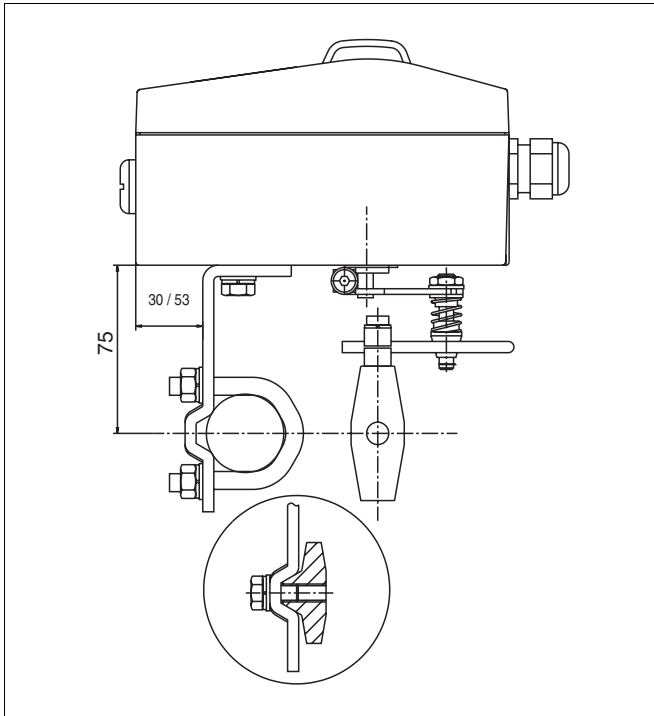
Mounting to linear actuators to DIN/IEC 534
